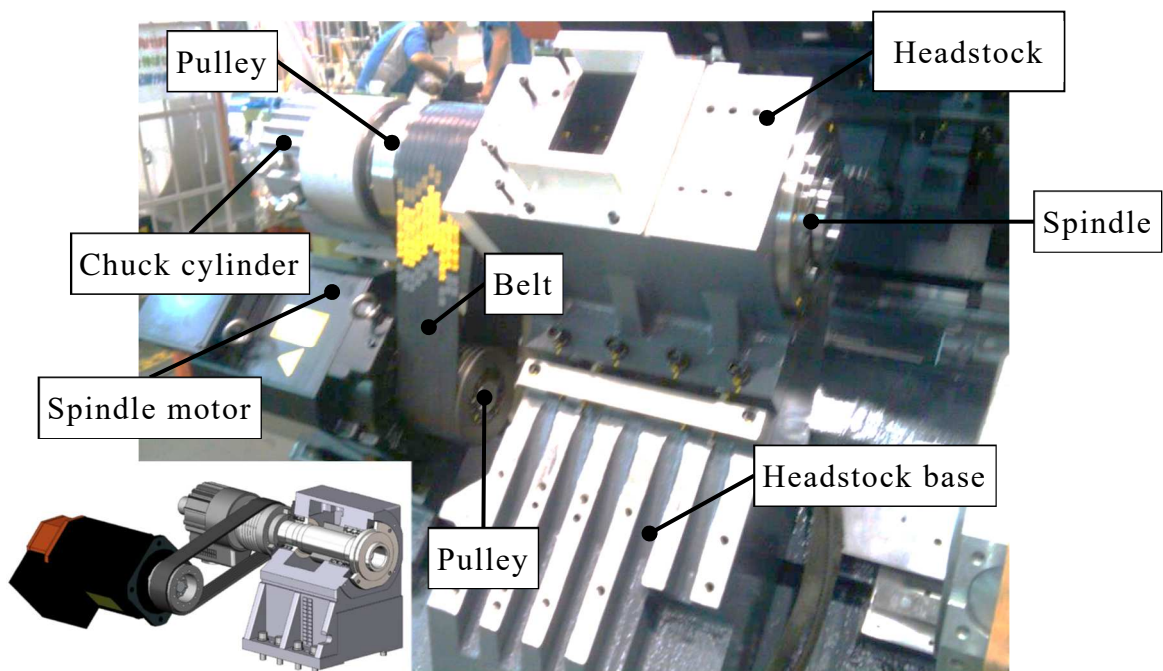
Structure of spindle unit of multi-tasking machine
